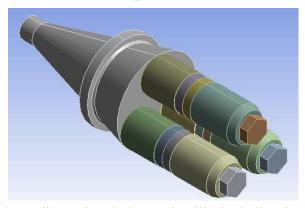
Three-dimensional ultrasonic elliptical vibration tool holder
